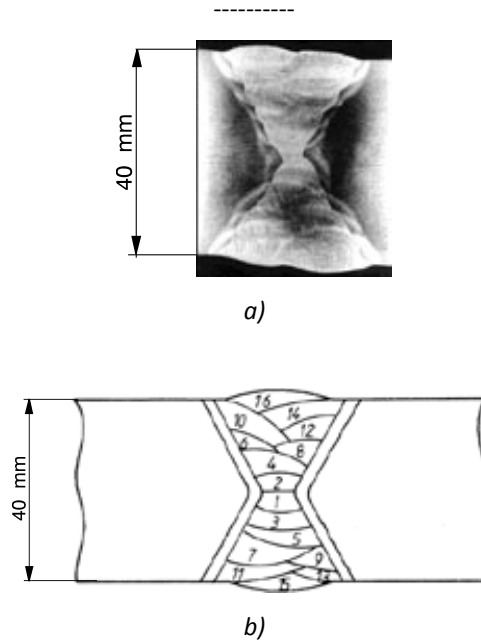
Cross-section of multi-pass under-matched joint with homogeneous weld metal a) and position - welding sequence of passes b)
